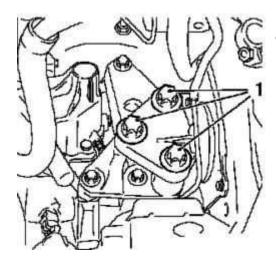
Mounting the left arm damping engine block: 1 - Bolts
